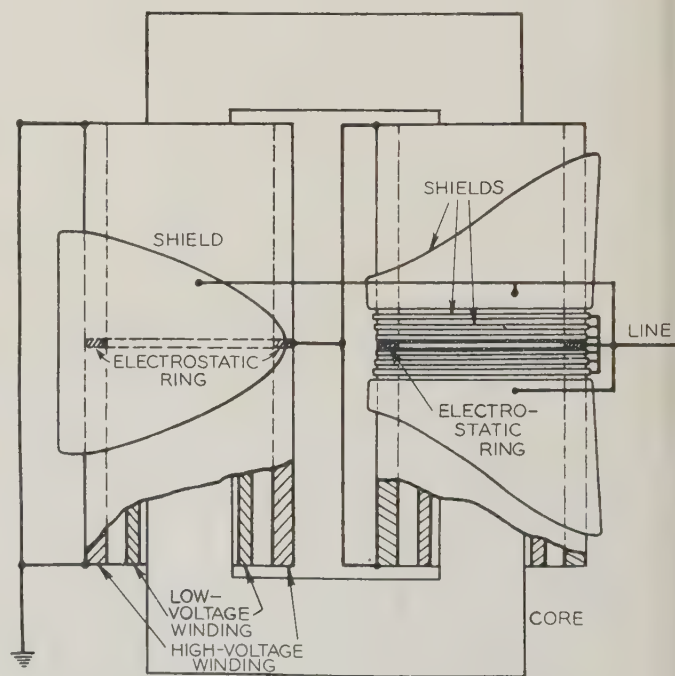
Arrangement of windings and shields in 55,000 kva transformer
